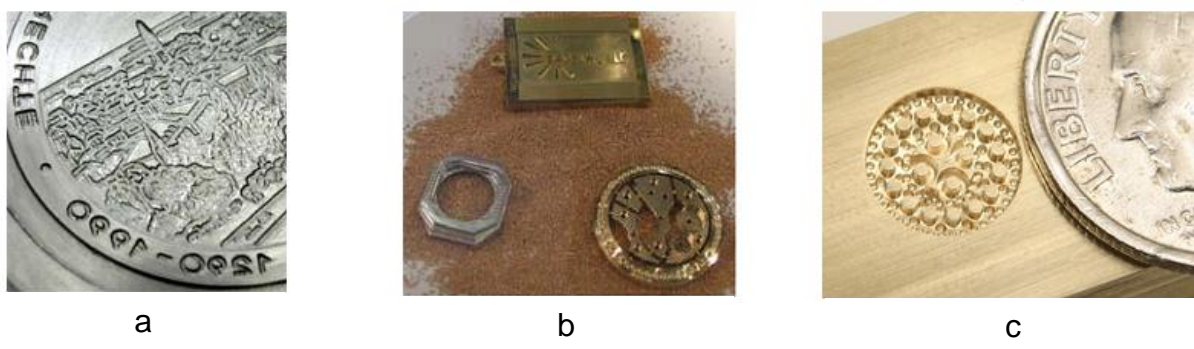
(a) Engraving watch base plate; (b) Watch parts; (c) Pendant mould [3]
